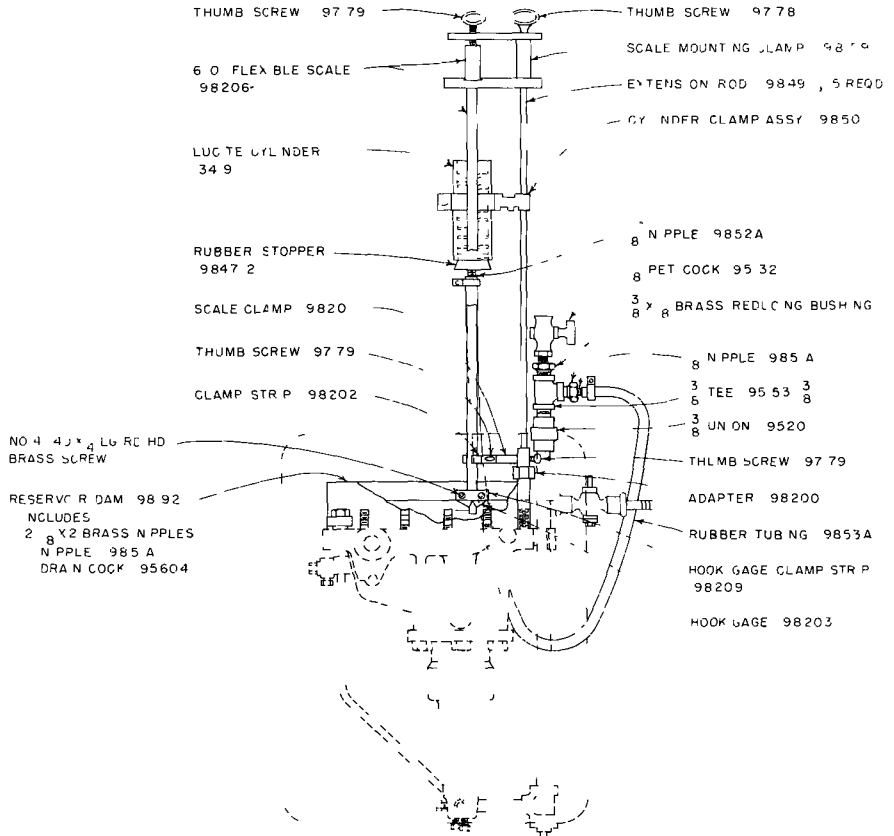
Parts Drawing G99 45, Calibration Outfit Pt. No. 198207A1
